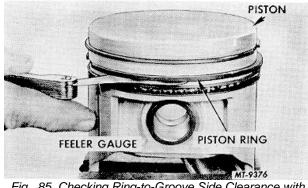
Checking Ring-to-Groove Side Clearance with Feeler Gauge
